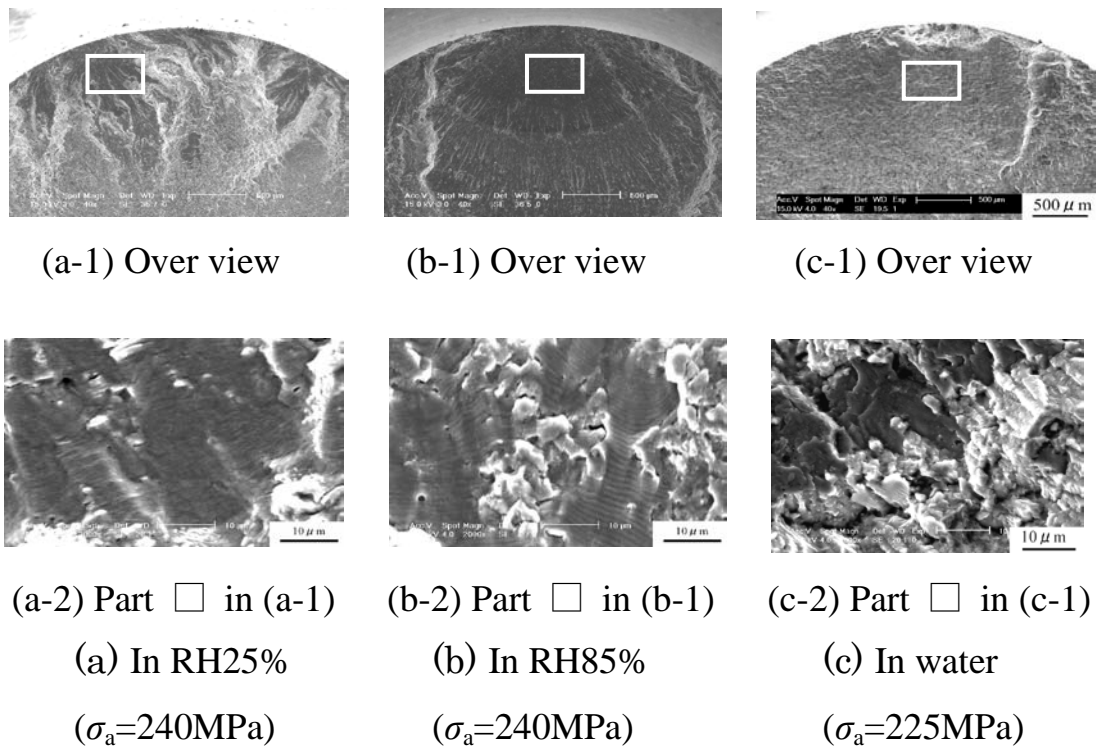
Fracture surfaces under rotating bending (tensile mode).
